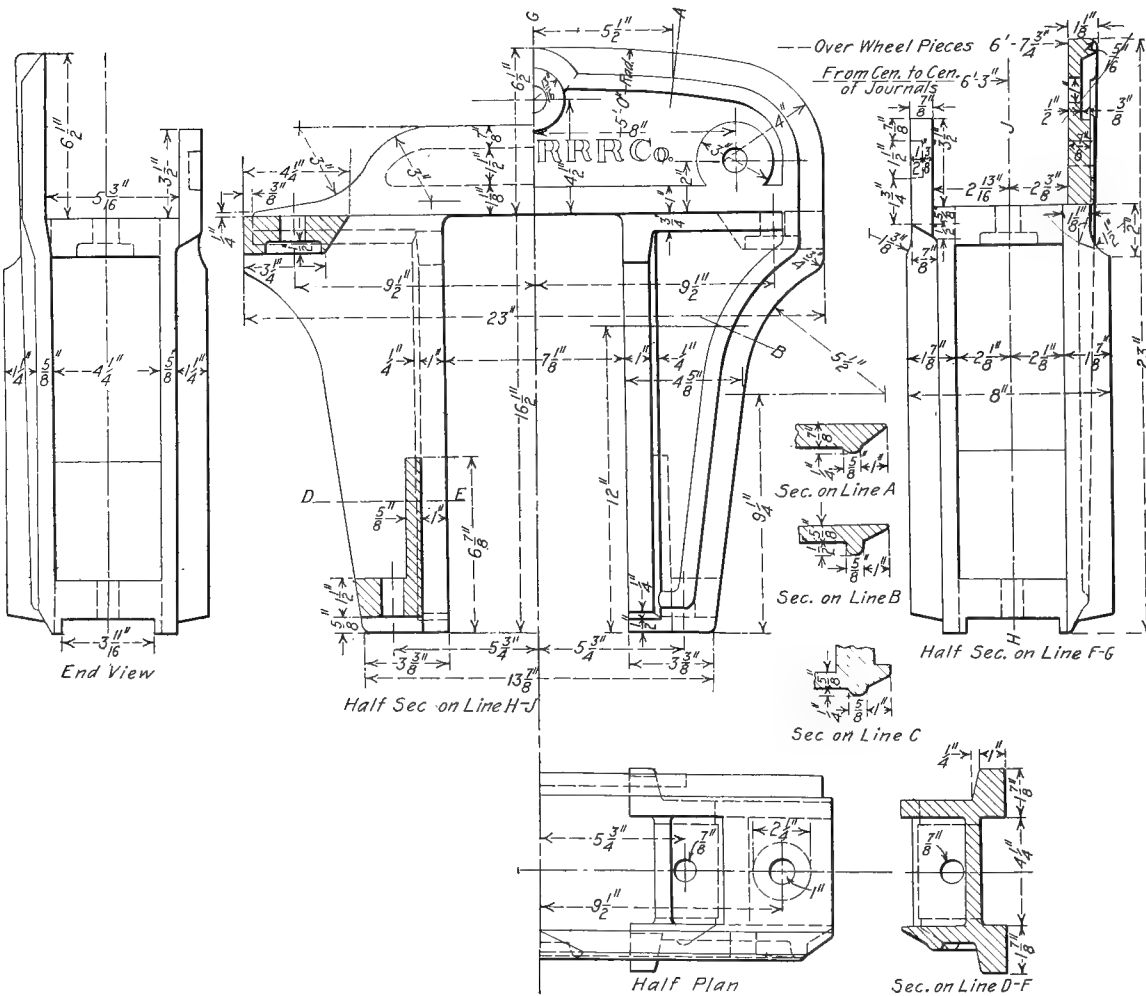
M. C. B. Standard Pedestal for 4 1/4 in. by 8 in. Journal. (M. C. B. Sheet 22.)
